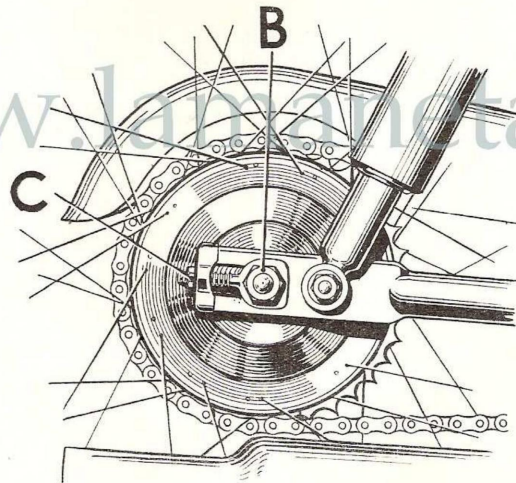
Rear Wheel Removal and Chain Adjustment.
